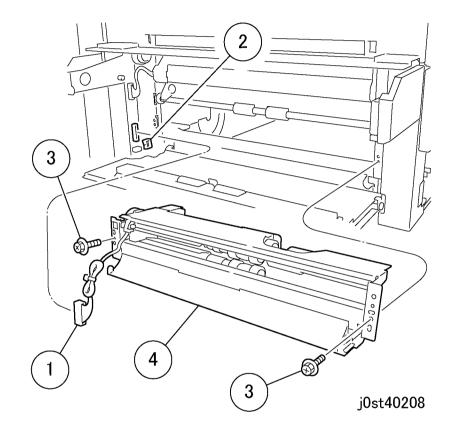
Removing the Feeder 2 Assembly (j0st40208)
